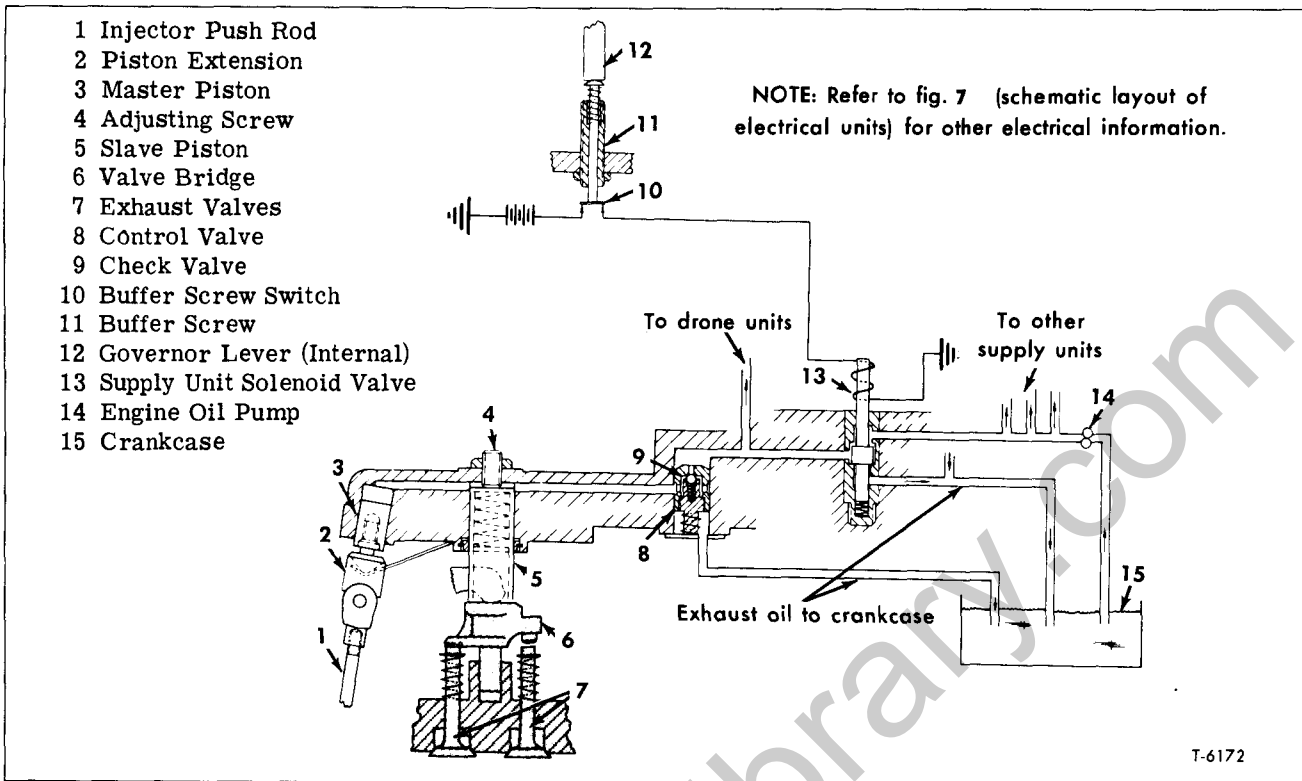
Schematic Arrangement of Brake Units and Hydraulic Circuits
